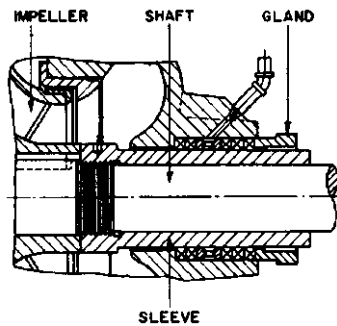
A sleeve threaded onto a shaft with no external locknut
